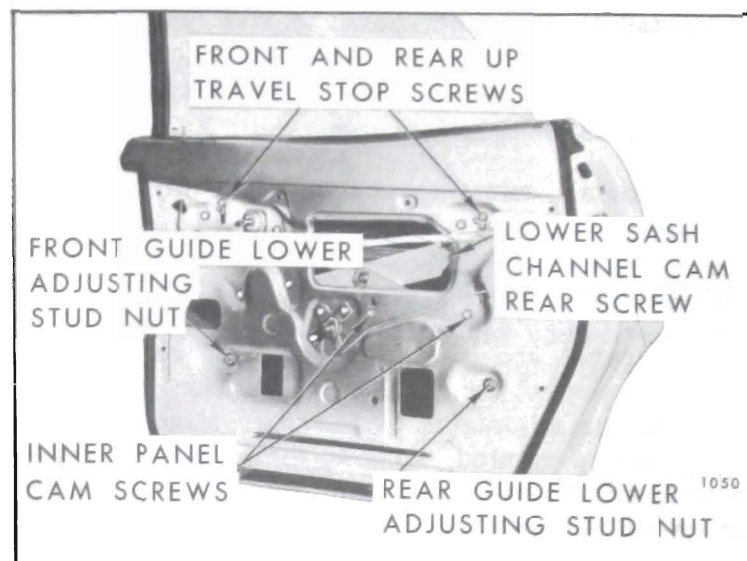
Rear Door Hardware - "Z-39" Styles
